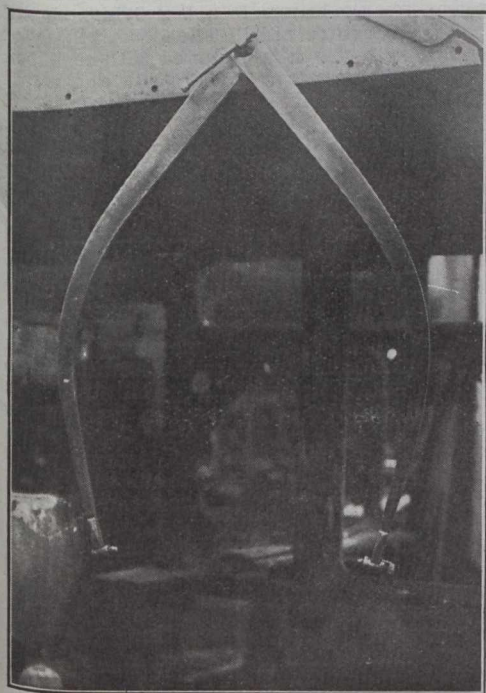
Calipers for Passenger Car Wheel Lathe.
